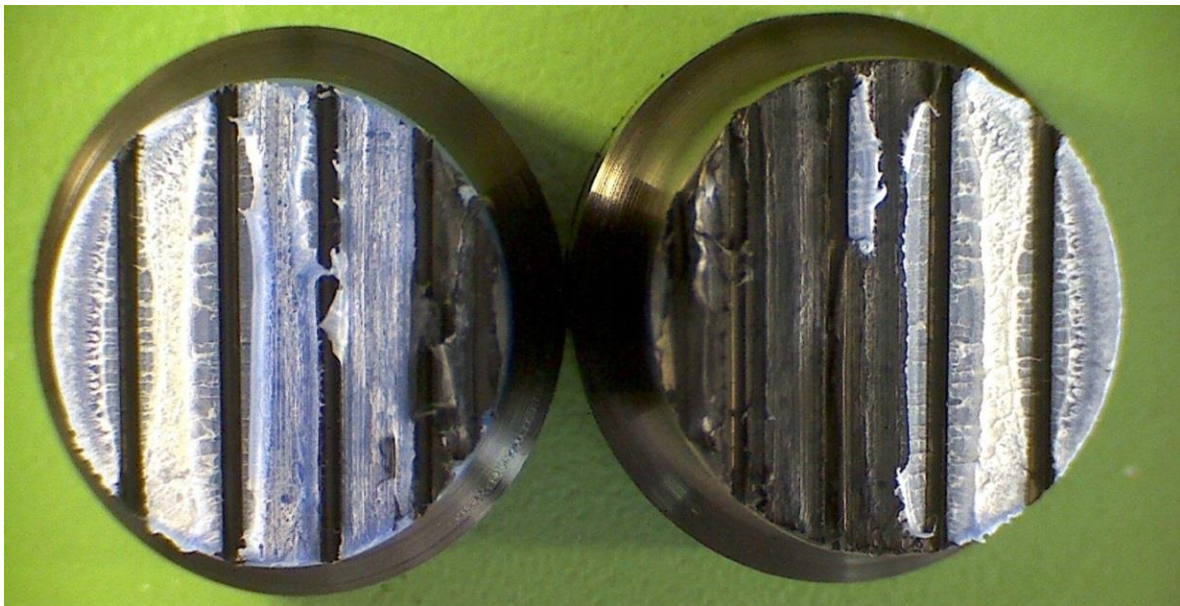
Fracture surface of a tensile creep rupture test specimen from the 710mm EF joint containing no flaws.
